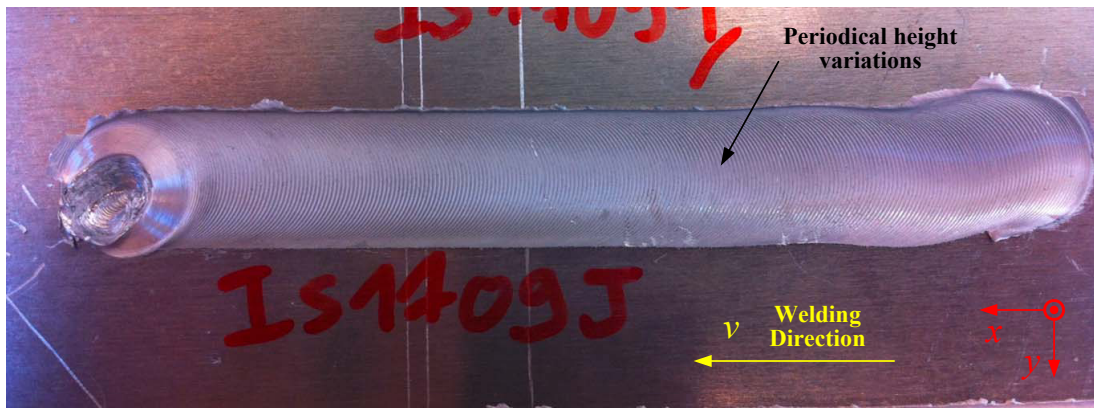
Welded workpiece after the FSW process (test IS1709J)
